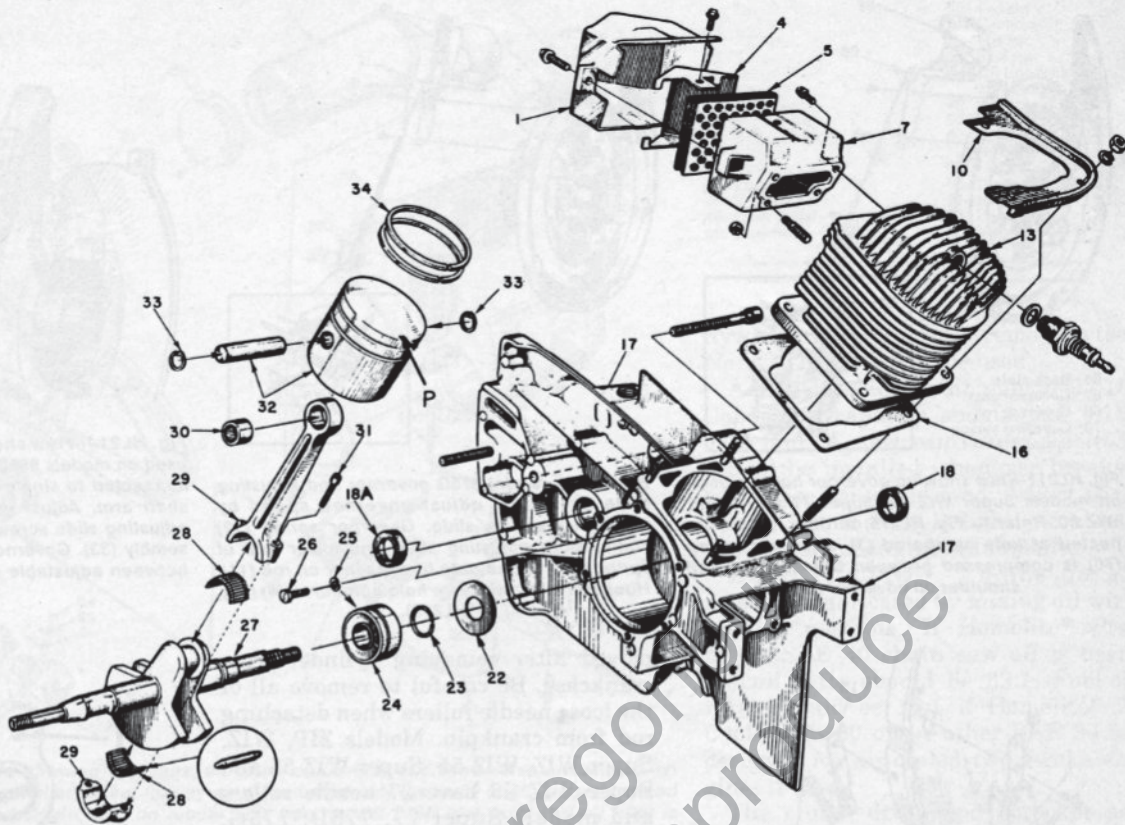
Exploded view of model 995G engine. Cylinder, crankshaft, connecting rod and piston installation of all other models are similar. Models ZIP and 775D are not fitted with crankcase crankshaft seal (18); crankcases on these models are fitted with a close fitting, non-renewable bronze oilite bushing. Note side of piston with ring retaining pin (P) is away from exhaust port (muffler) side of engine.
